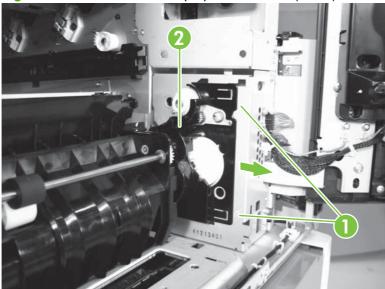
Remove the multipurpose drive unit (4 of 7)
